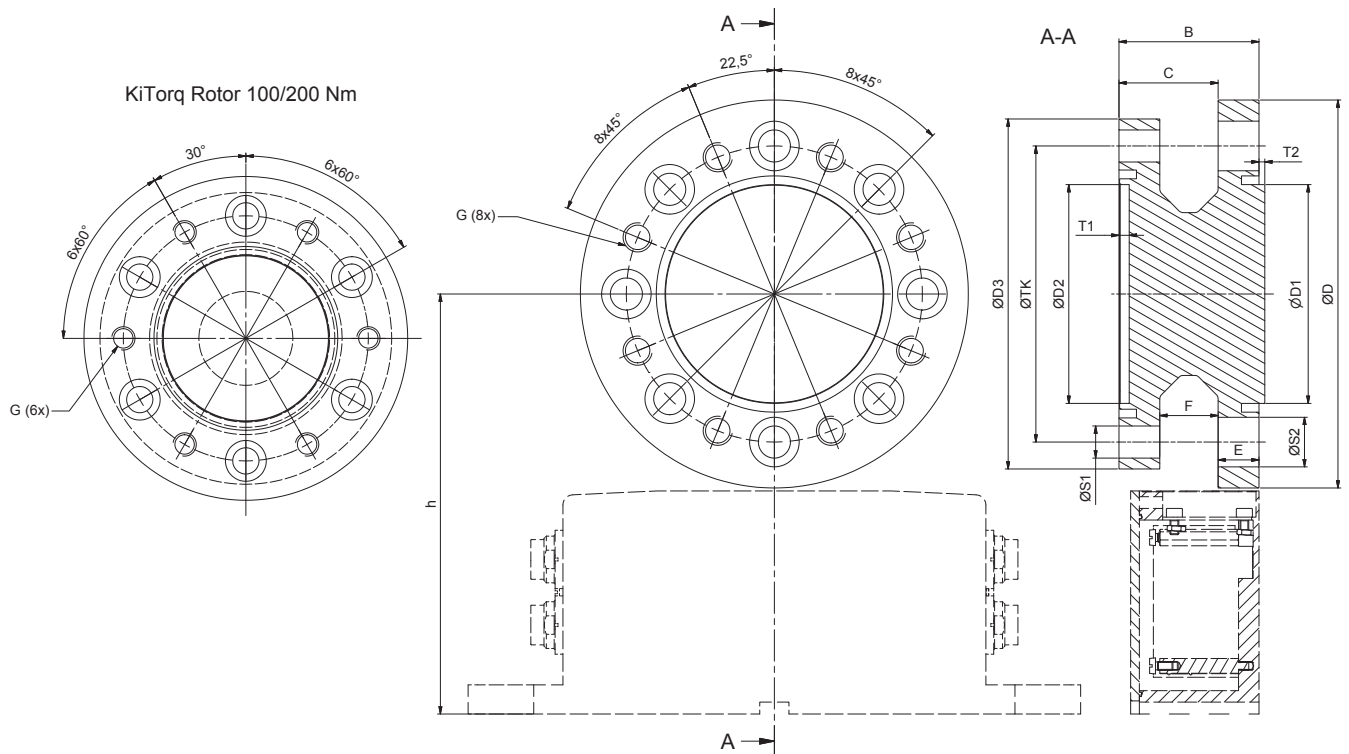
Dimensional drawing of Type 4550A... KiTorq Rotor torque measuring unit
